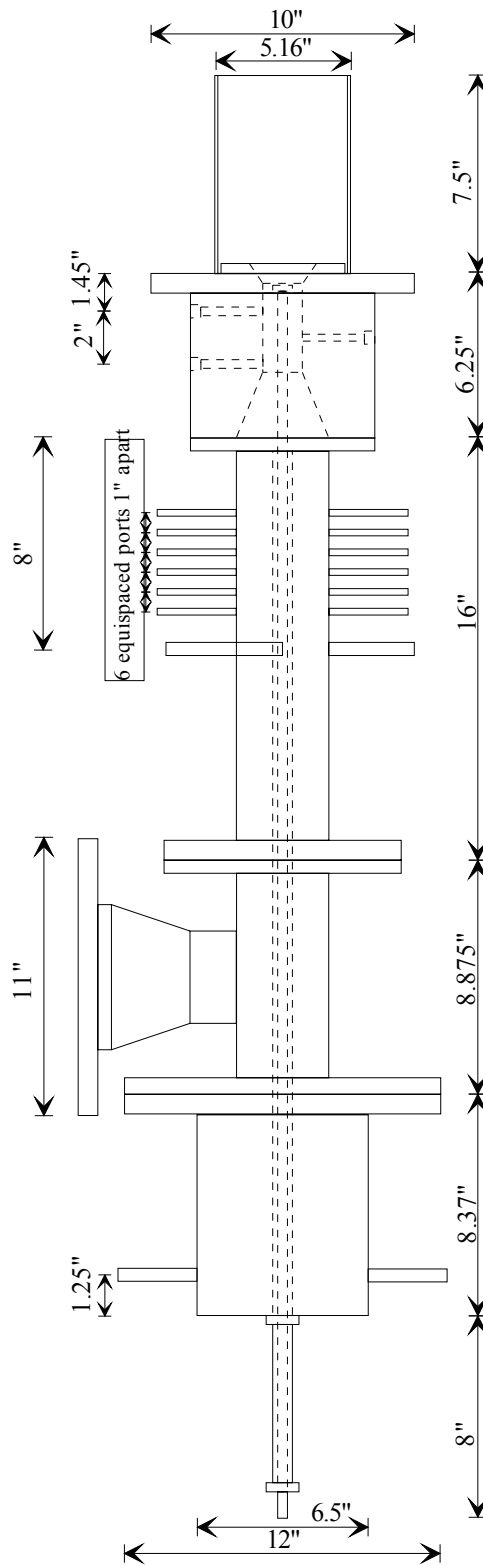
Dimensioned Drawing of Swirl Stabilized Turbulent Combustor
